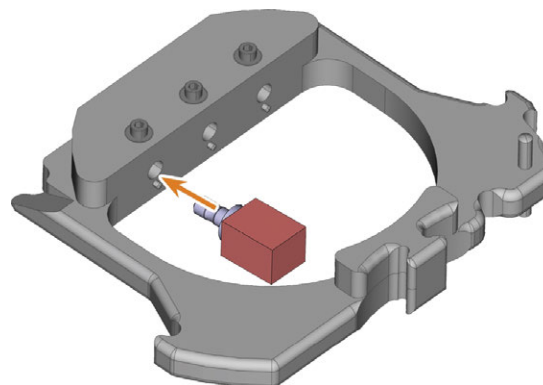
INSERTING A BLOCK INTO THE BLOCK HOLDER
